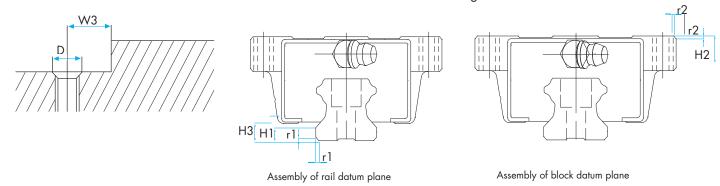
Dimensional tolerance between contact datum plane and mounting hole
